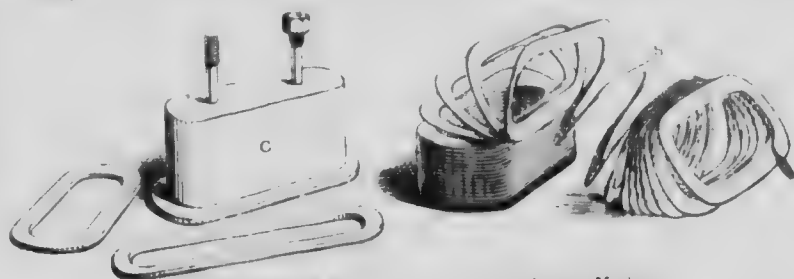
Shunt-Wound Field Coils for Large Multipolar Machine.
